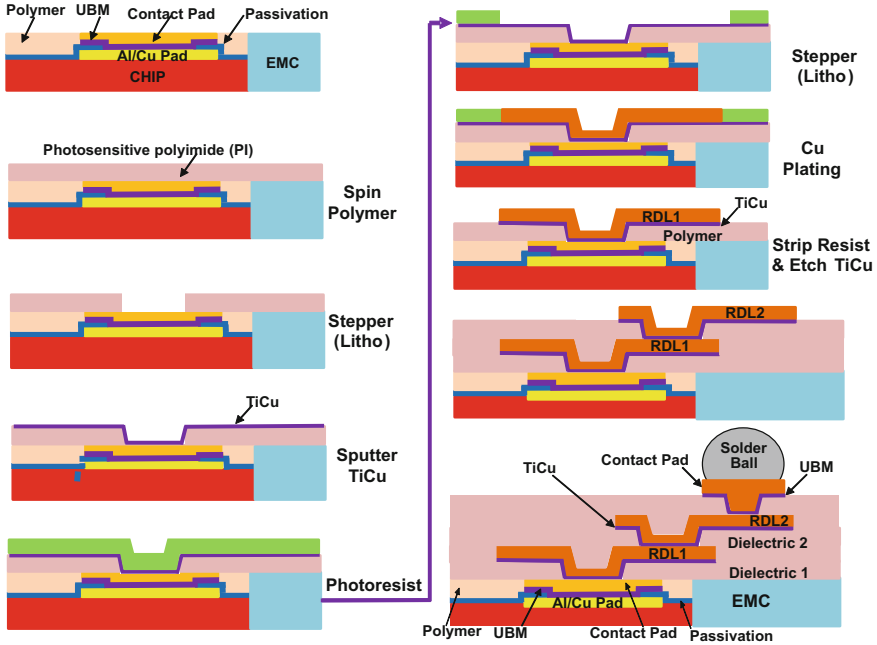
Key process steps in fabricating the RDLs of FOWLP with the conventional attachment of solder balls
